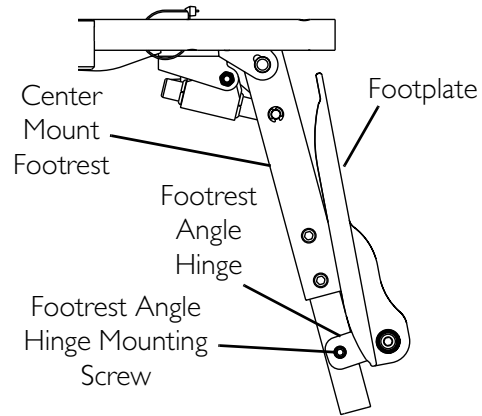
Adjusting the Tension of the Flip Up Footplate
